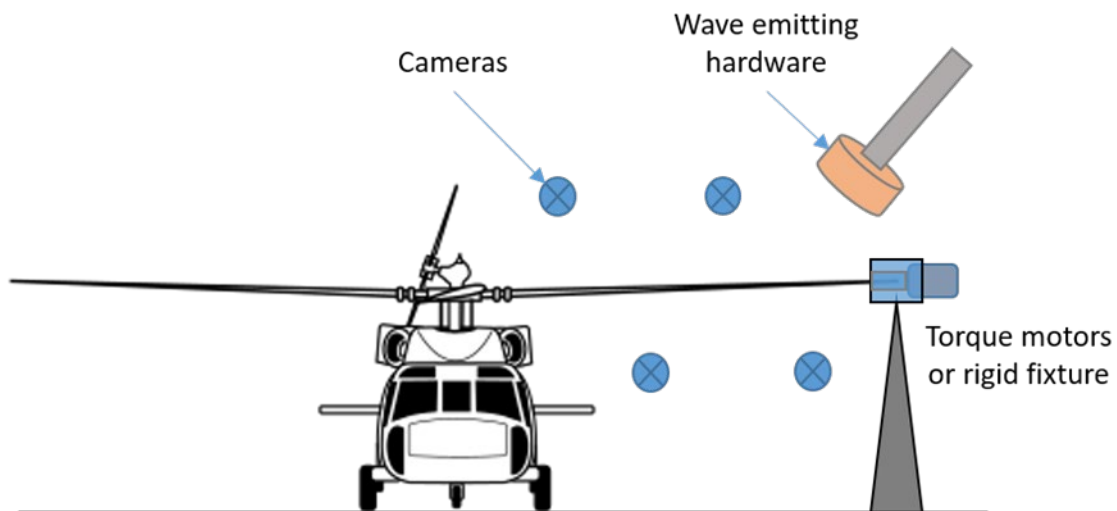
Depiction of Shearography Test Configuration for a Full Assembly. Adapted from *Introduction to Aerospace Engineering with a Flight Test Perspective* (2017, p. 29).
